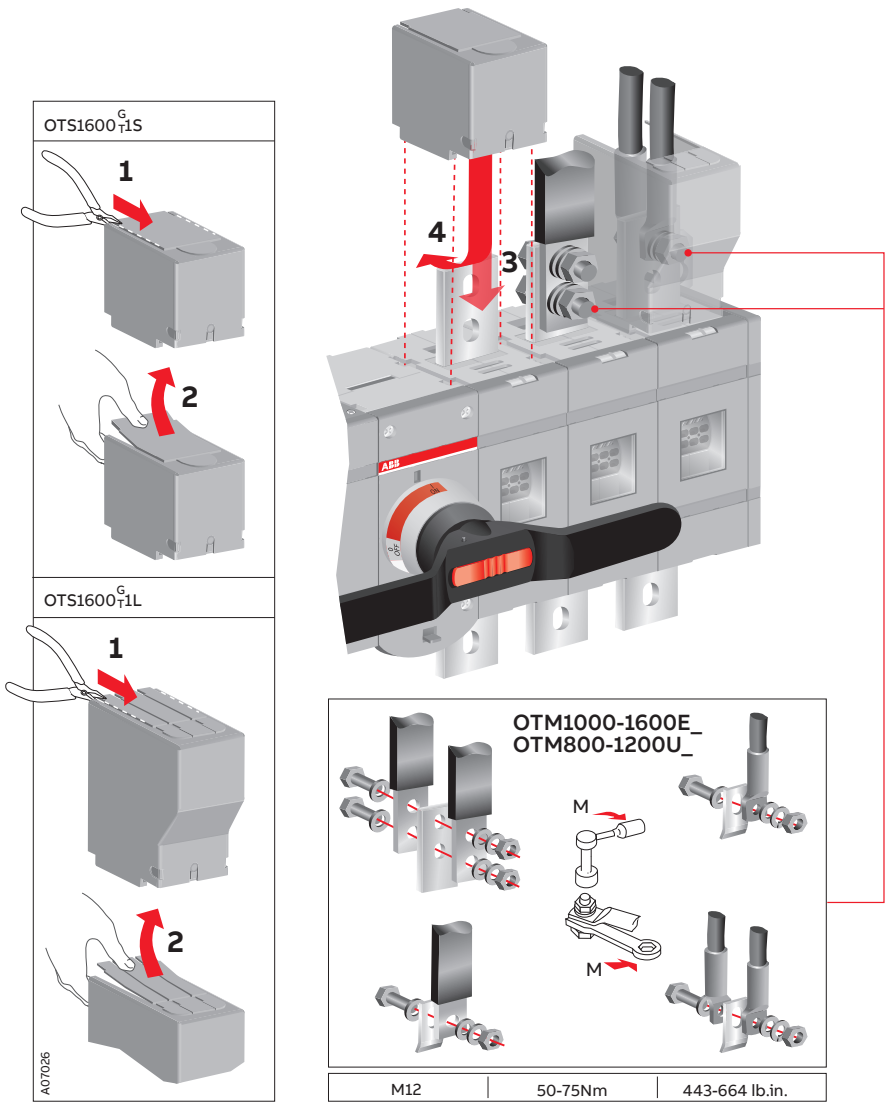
Mounting of the terminal shrouds (type OTS_) to the motorized switch-disconnectors OTM1000-1600E_ and OTM800U-1200U
